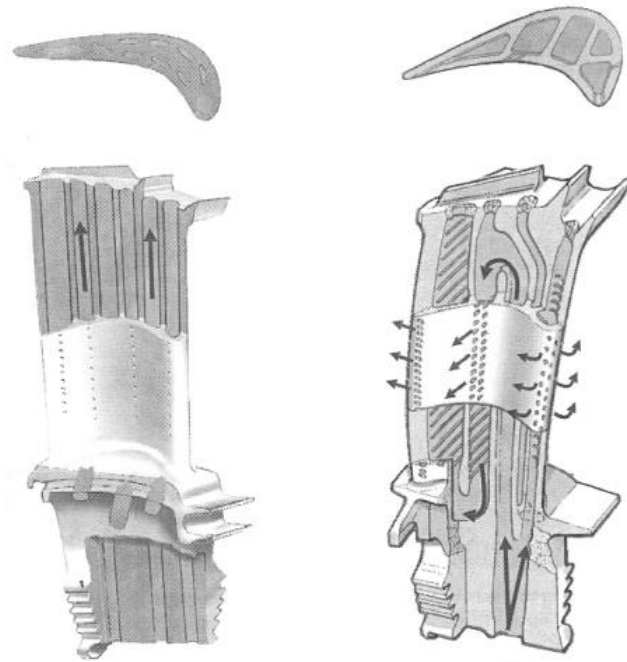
Cross section of a turbine blade showing an example of the complex cooling channels that can be produced (Reed, 2006,
